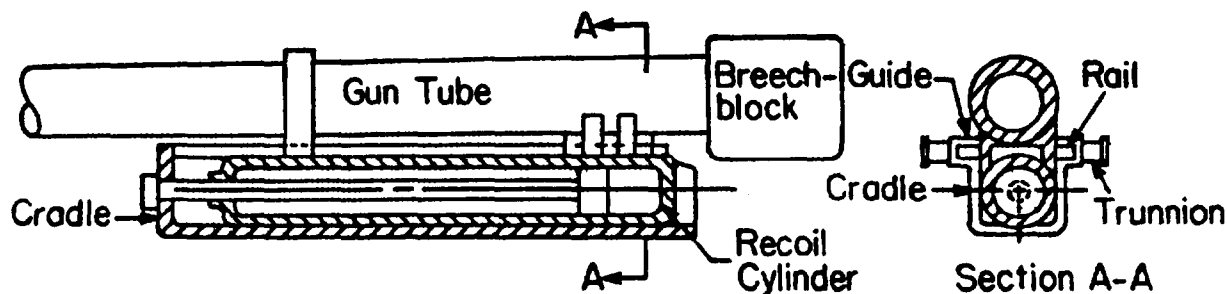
U-Type Cradle With Attached Recoil Mechanism
